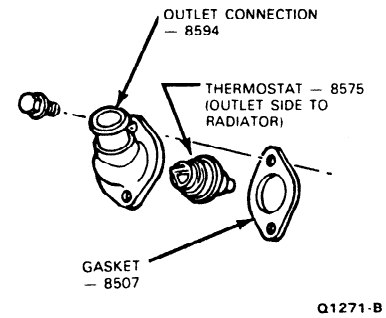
4-Cylinder Thermostat and Housing — Disassembled View
